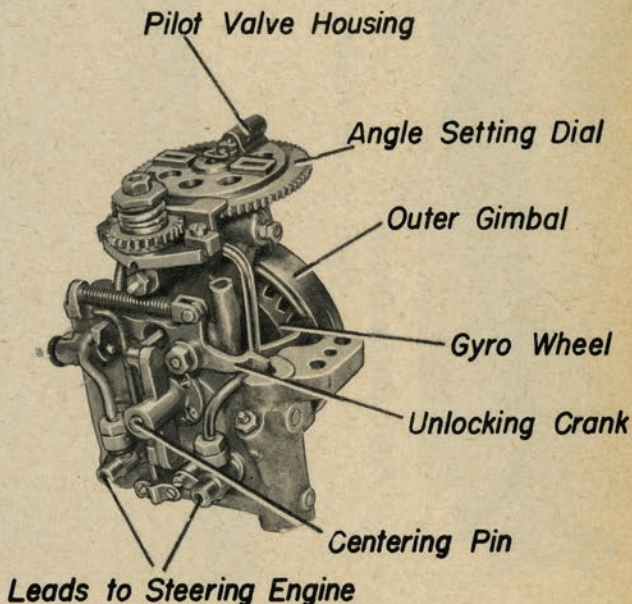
Torpedo Type 91 Mod 1, Gyro Mechanism
